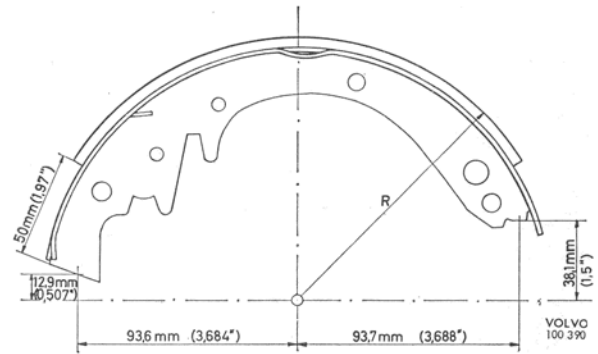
Adjustment dimensions for the rear brake shoes of the rear wheels
